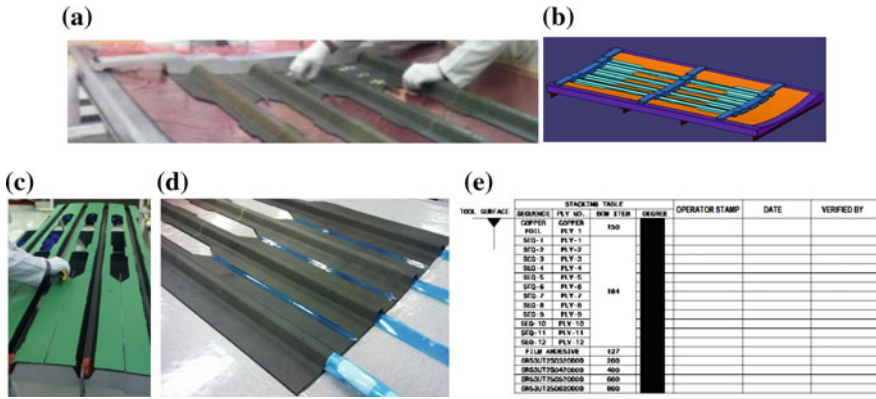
Lay-up of lower panel and stringer positioning—a Stringer positioning. b Stringer locators. c Film adhesive application. d Tube-shaped vacuum bag. e Lay-up check and verification uncured skin. Bridges (stringer locators) were used for positioning of stringers (Fig. 18a, b). Each lay-up orientation was stamped by the operator and verified by an inspector (Fig. 18e).
